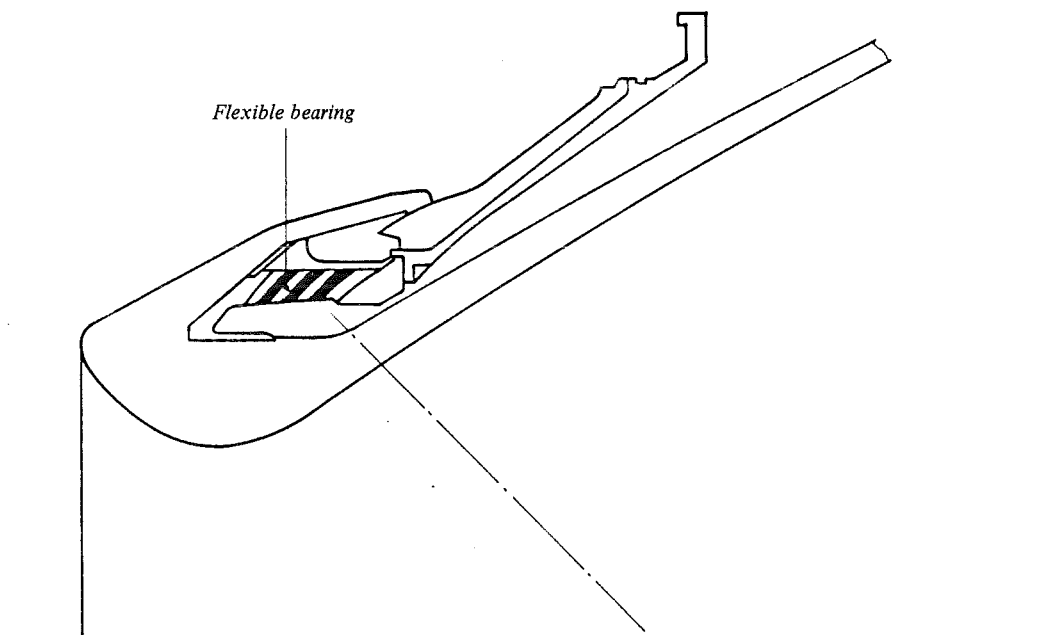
NOZZLE HINGED BY A FLEXIBLE BEARING
